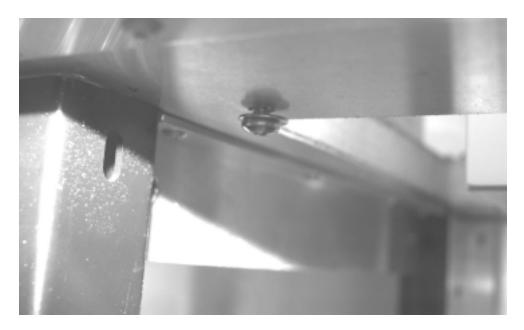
8500 module enclosure on top of outdoor enclosure.
